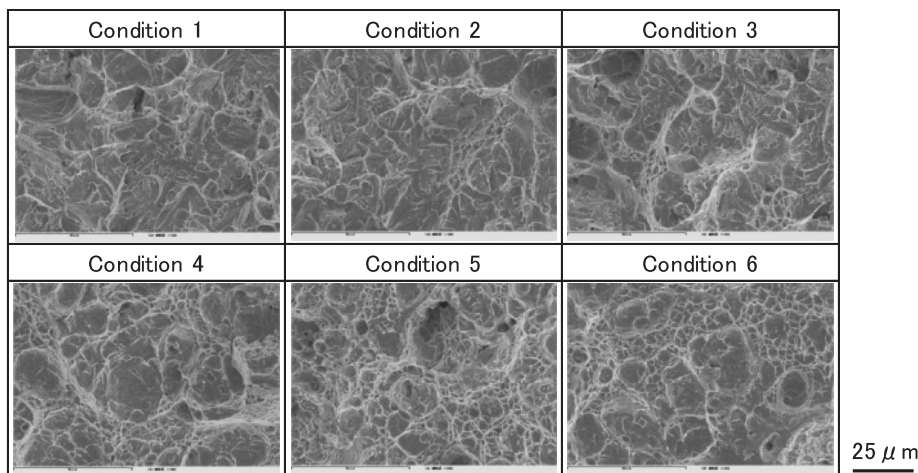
SEM images of fractured surface after bending test (Crack propagation area)
